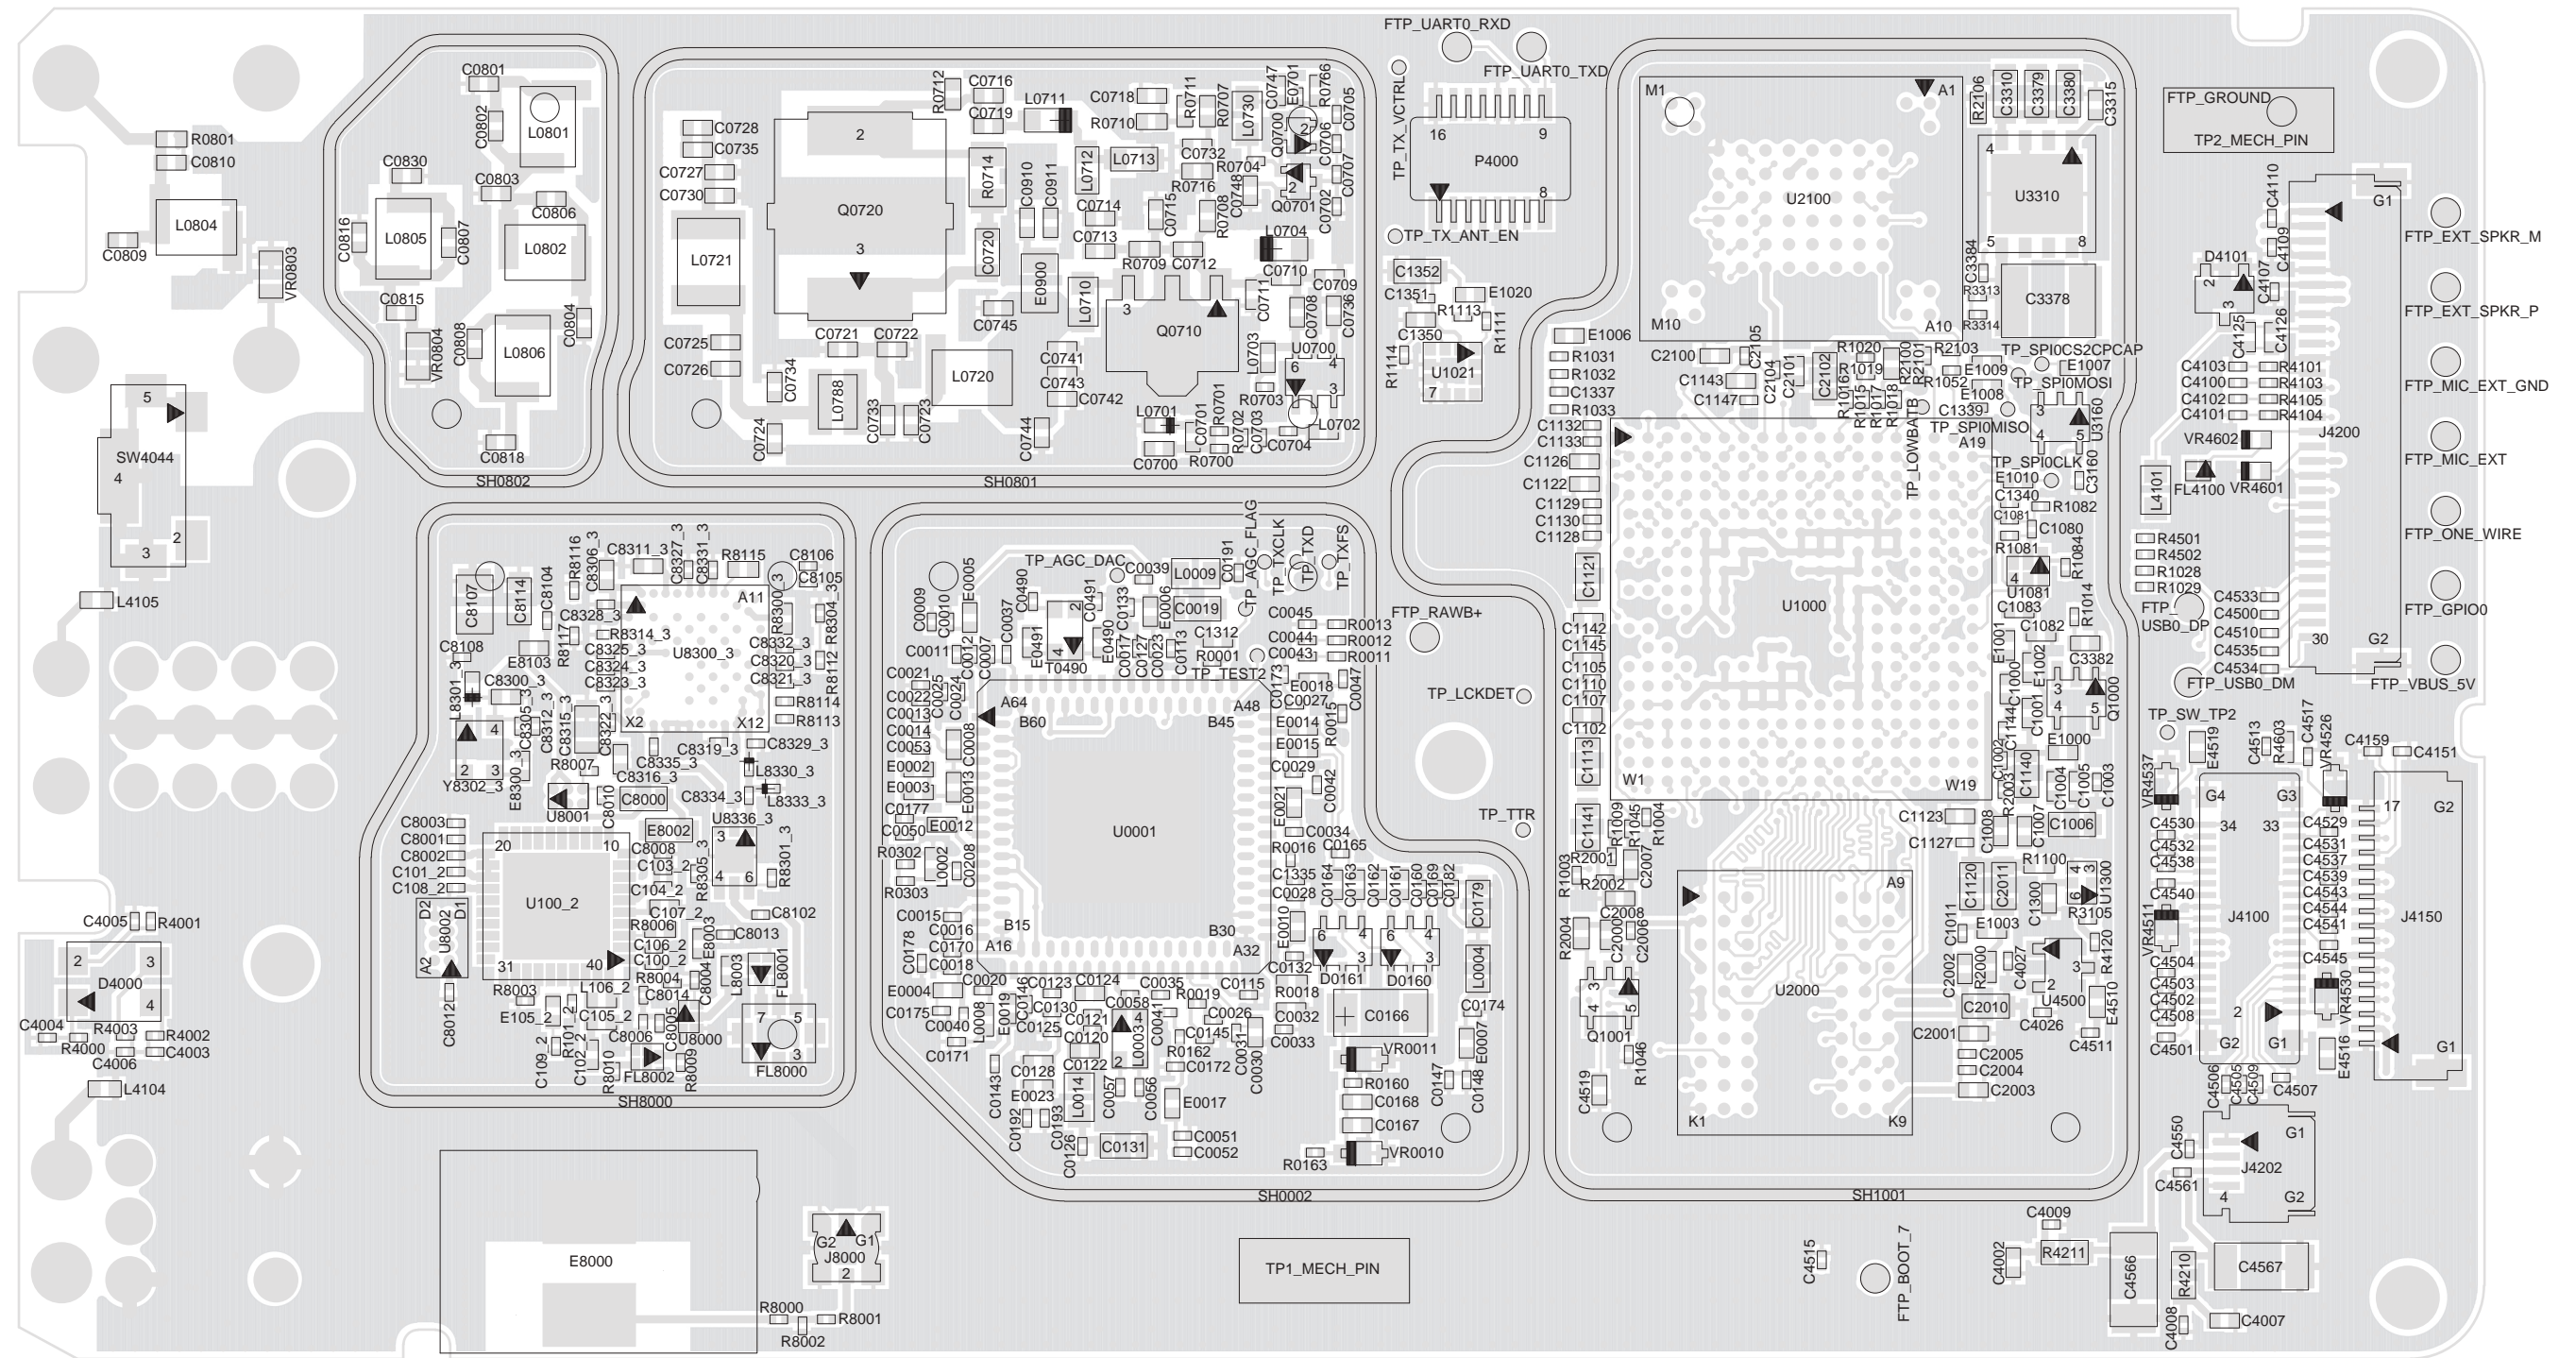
Main Board VHF Top Side PCB No. PC000975A01\_AA
